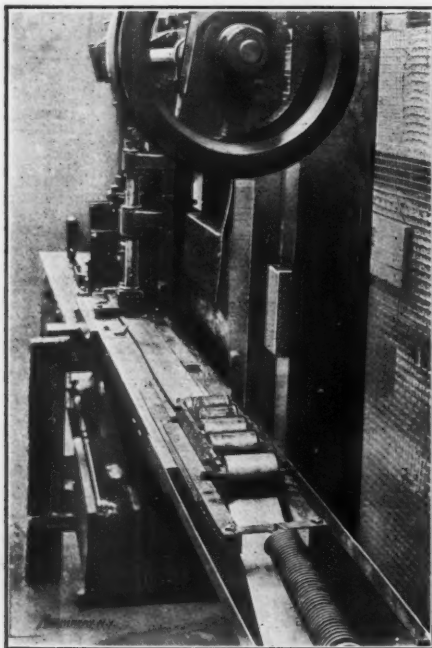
Edge Turning Rolls used on the Automatic Machine for Edging the Fin Strips
